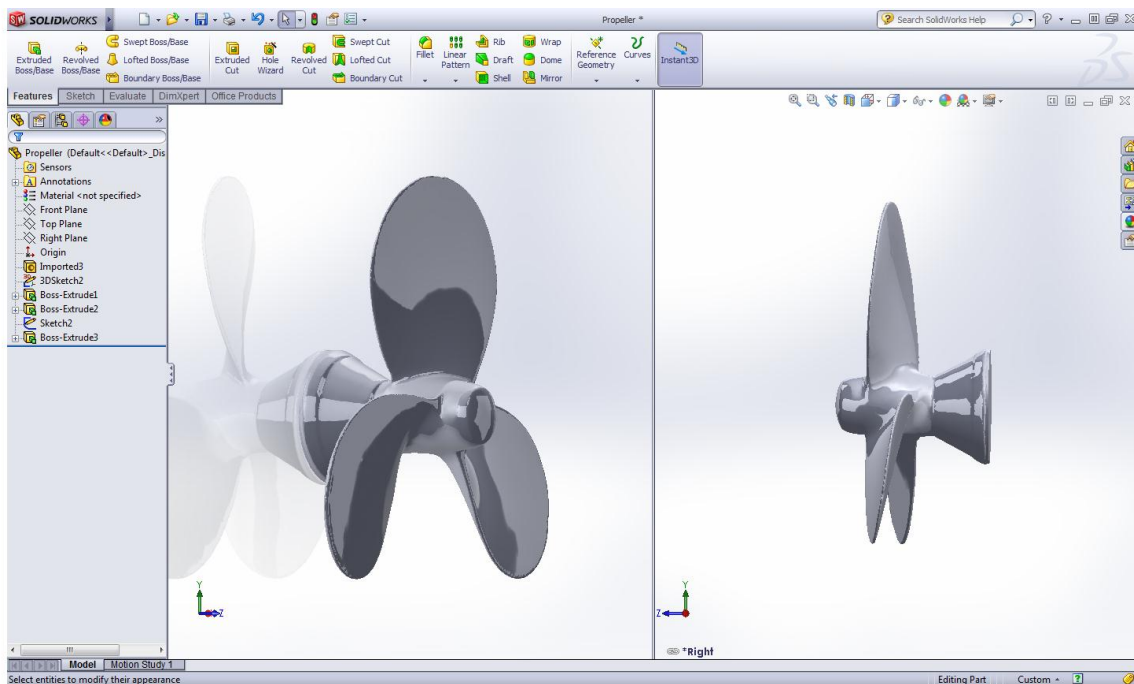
Final rotor design prior to assembly to generator part in SolidWorks.
